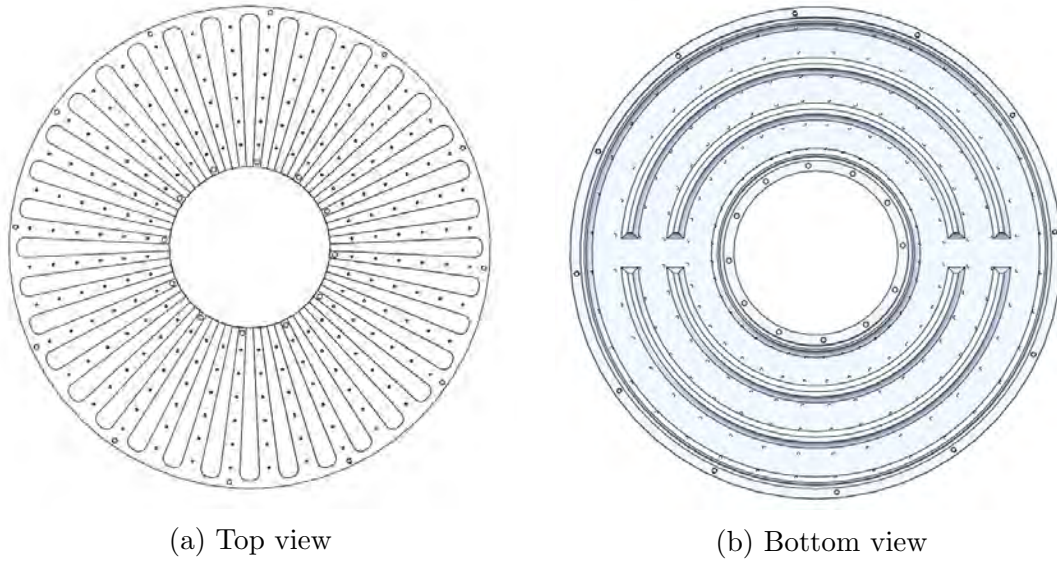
Top and bottom CAD view of heat exchanger body.
